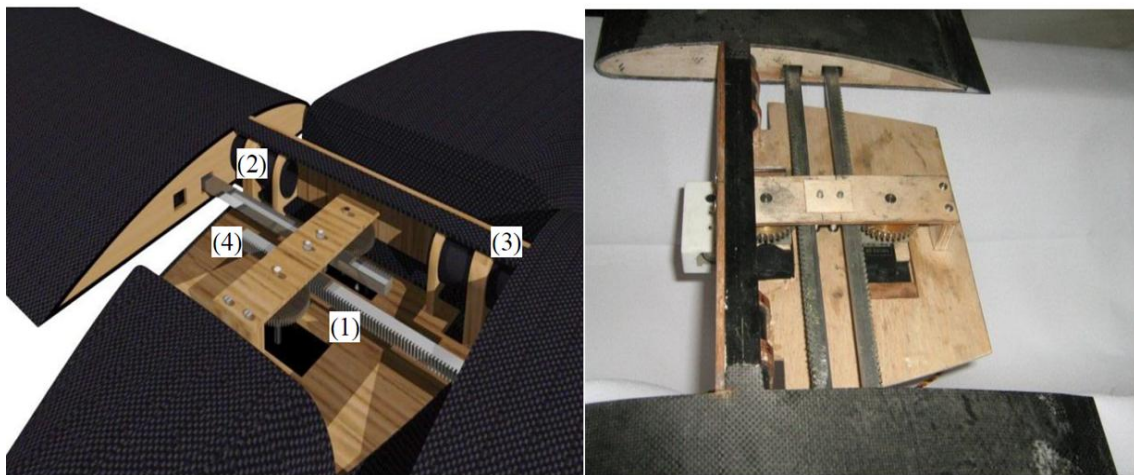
CAD Drawing (left) and the actual actuation system (right) with: 1- Support Board; 2- Board Linkage; 3- Wing to Fuselage Connection; and 4- Upper Board [26].
